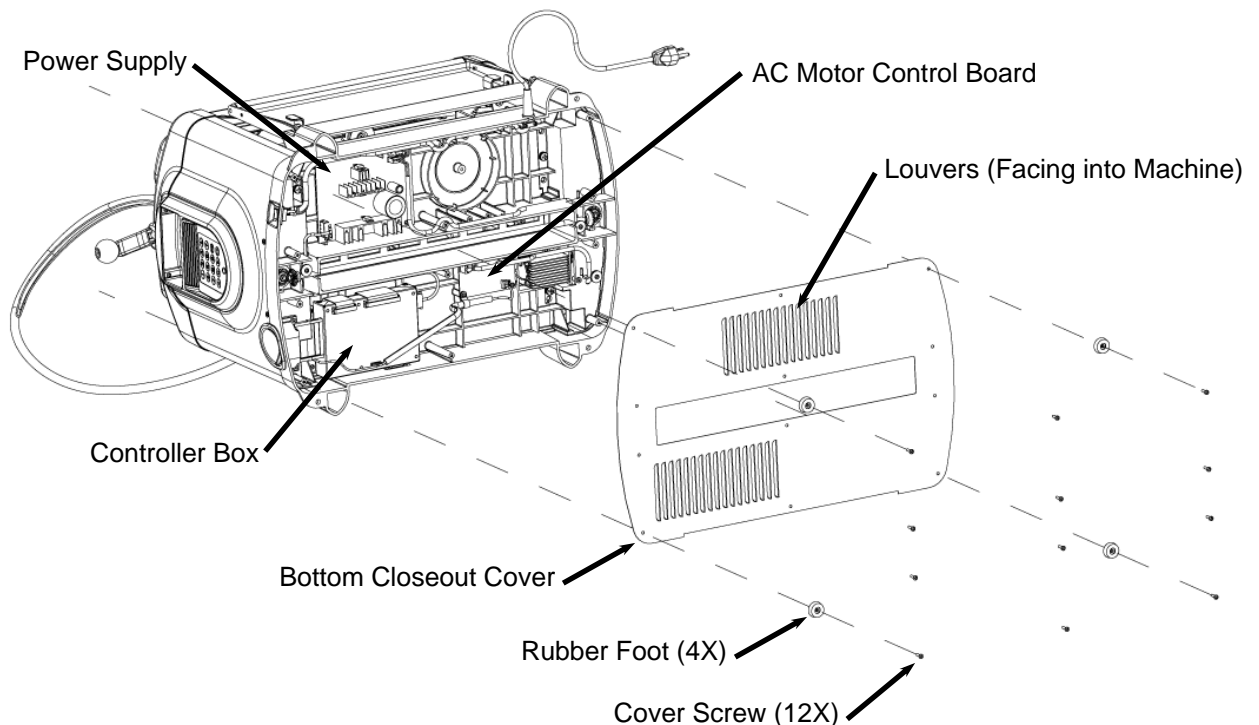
REMOVAL OF THE BOTTOM COVER
